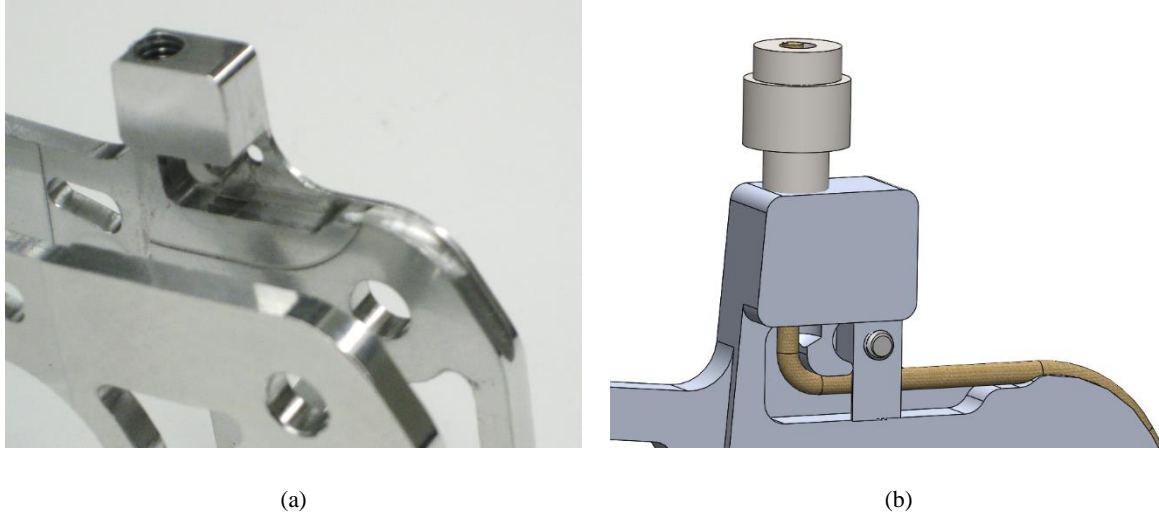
The drive rope routing through the spring cam carriage frame. (a) A close up of the actual part. The radiused groove for the rope to wrap over the corner can be seen on the top right edge. (b) A SolidWorks screenshot of the rope routing with the adjustment screw and the rope included. At the bottom center, the rope is covered up by a small piece bolted onto the frame. This piece is in place to ensure that the rope remains aligned with the radiused groove on the edge of the frame.
